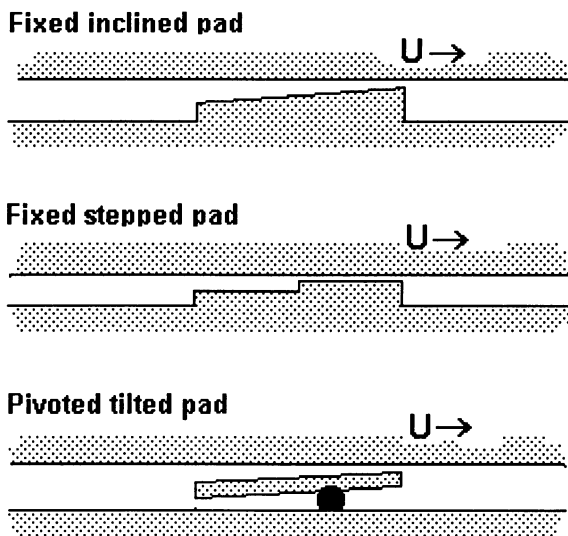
Partial-bearing configurations that may be used separately or in clusters on both axial and radial surfaces.
